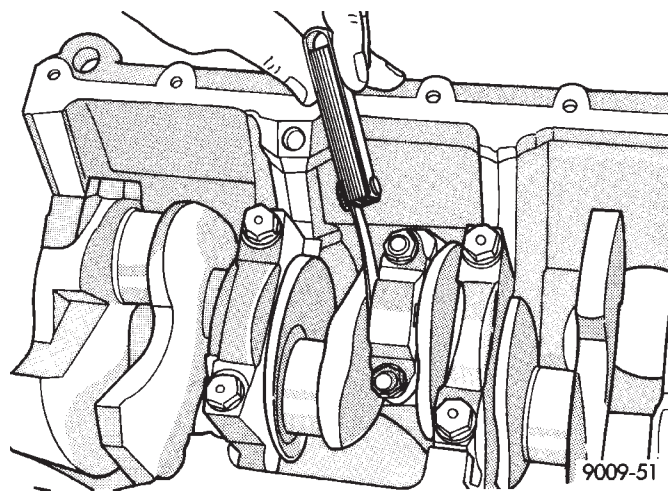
Checking Connecting Rod Side Clearance—Typical
